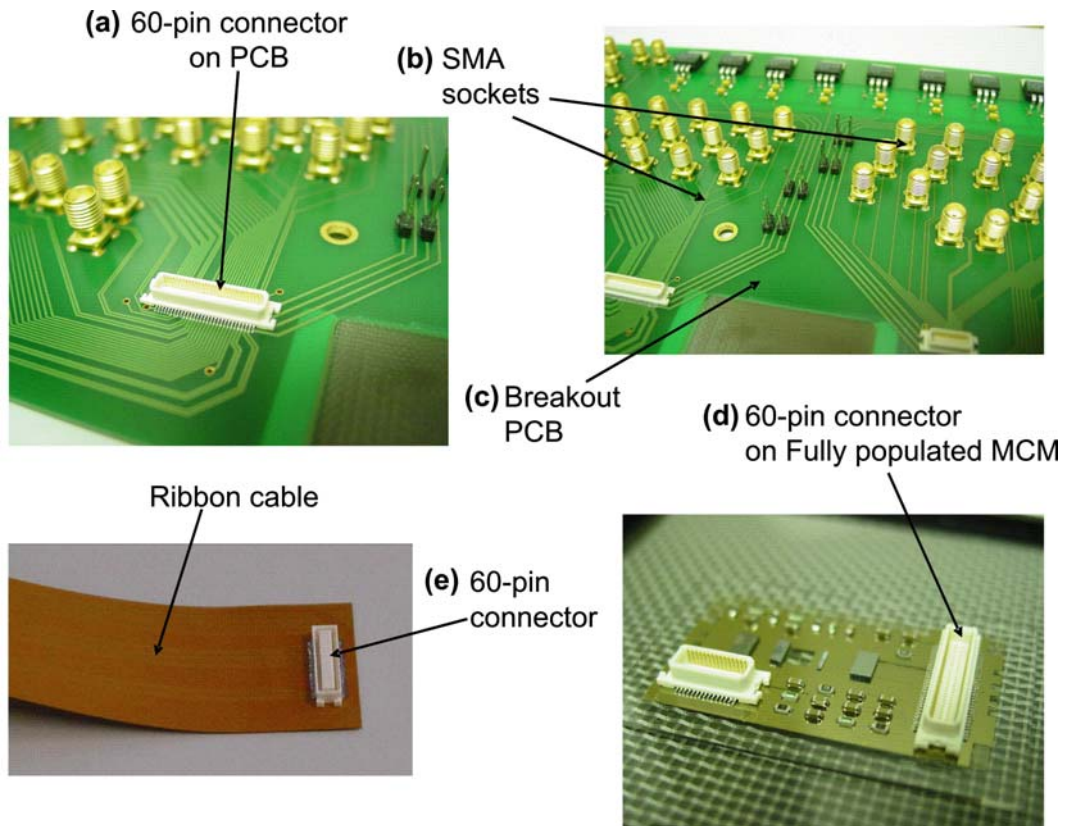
Photos showing: (a) 60-pin connector on breakout PCB, (b) SMA sockets on PCB, (c) Breakout PCB, (d) 60-pin connector on populated MCM, (e) Ribbon cable and associated 60-pin connector.
